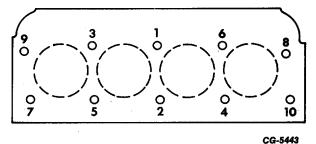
Cylinder Head Mounting Bolt Tightening Sequence
